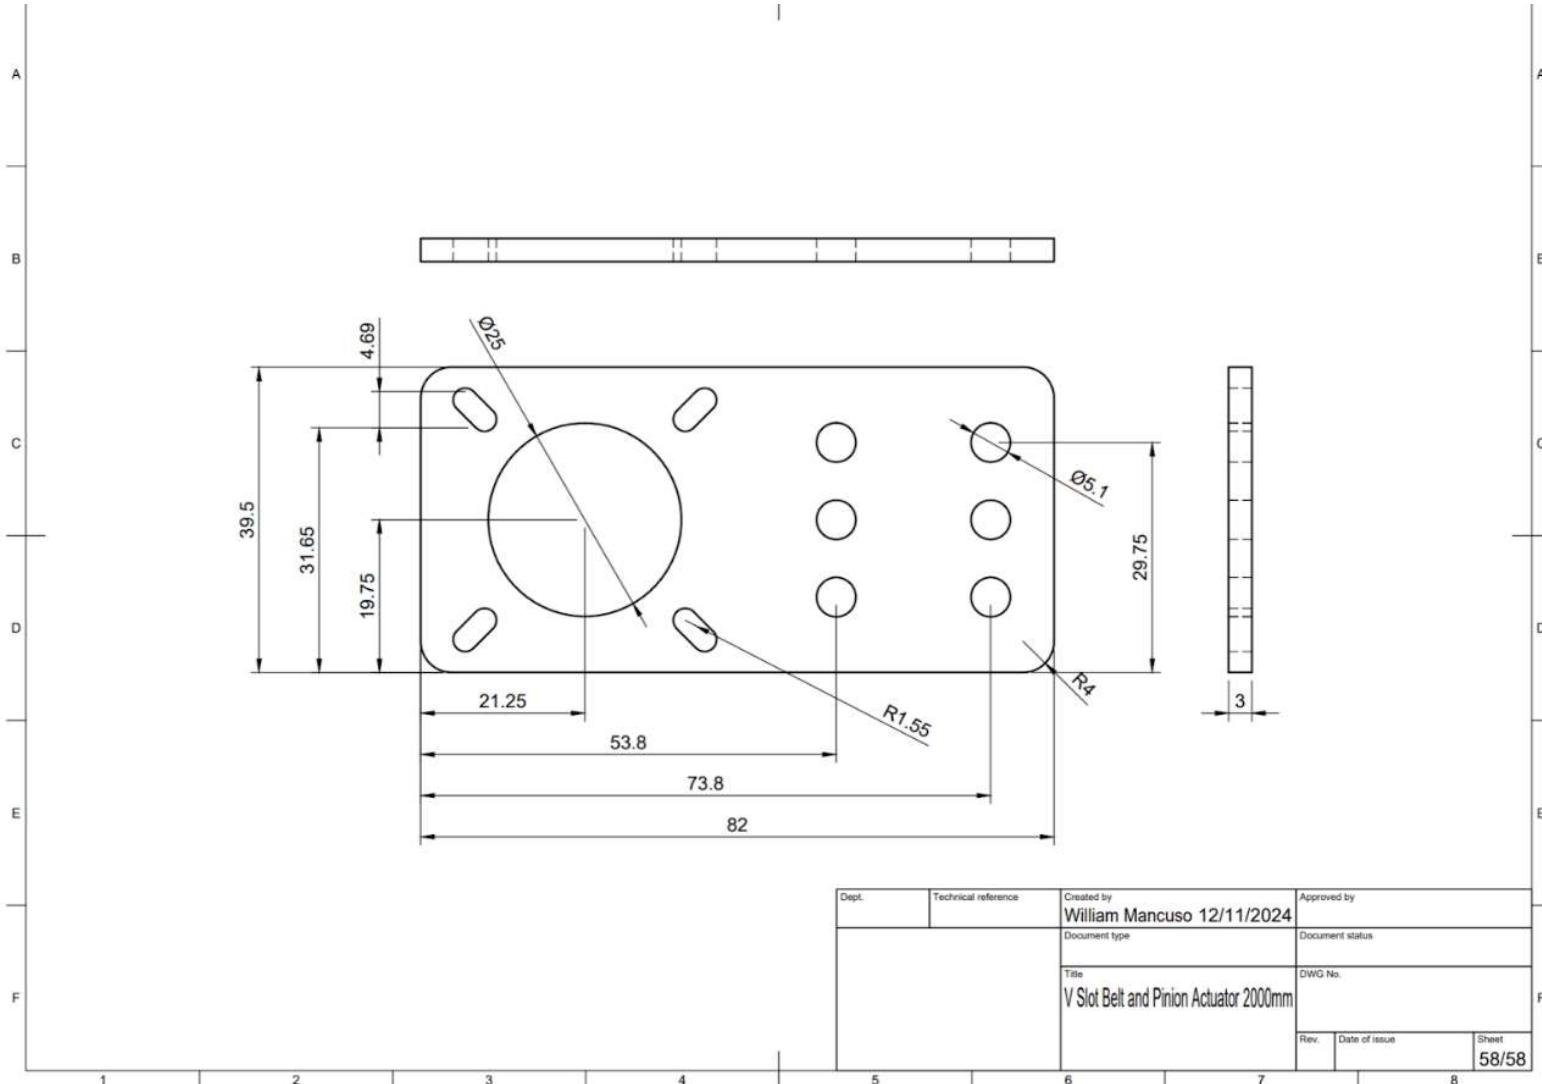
Manufacturing Drawing of part SS#2.1-P#2 – Secondary Gantry Plate
